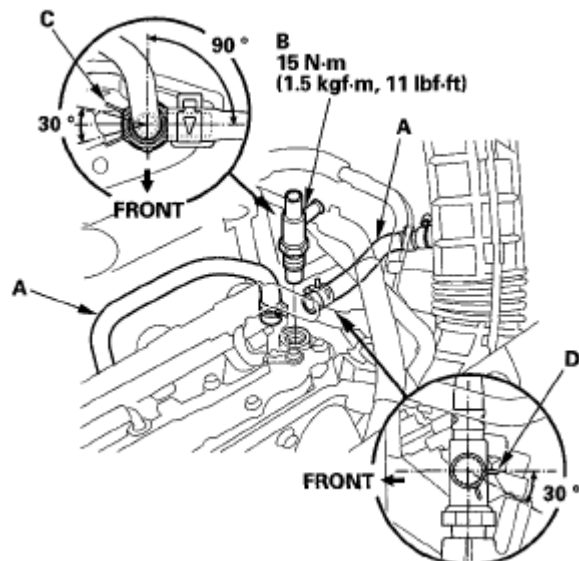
Identifying Intake Air Bypass Control Thermal Valve Parts Location With Torque Specification
